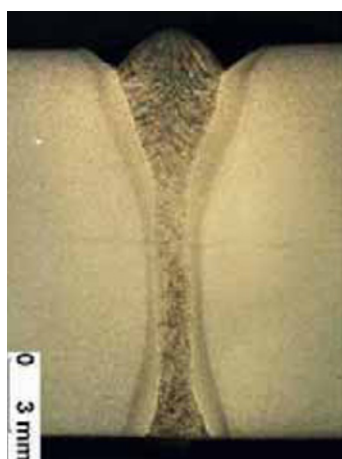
Single pass welding of 20 mm thick material with an autogenous laser process
